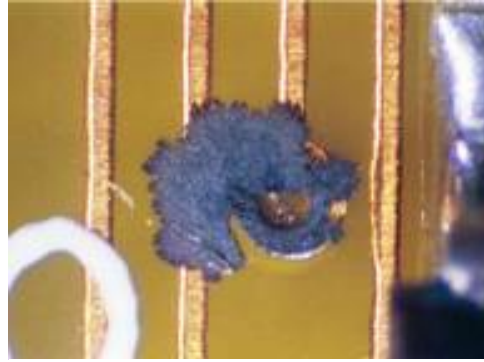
Short-circuit on PCB caused by corrosion.
